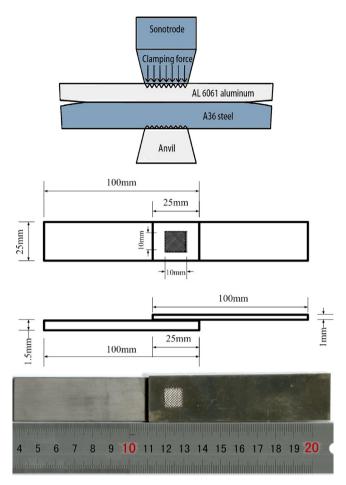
Schematic diagram of ultrasonic welding and specimen dimension. Approximate weldment for tensile-shear test.
